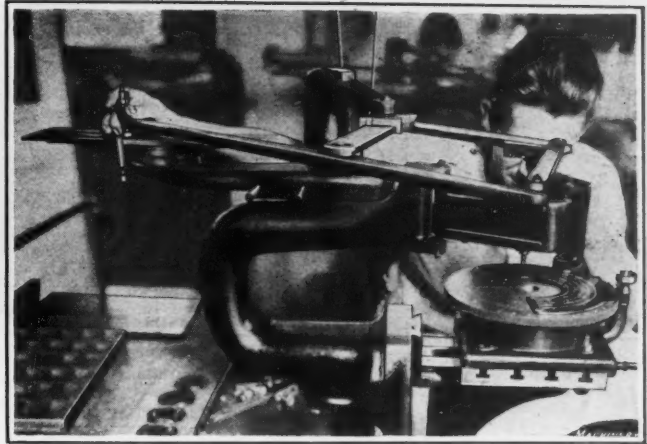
Universal Indexing Fixture for graduating Standard Circular Scales
